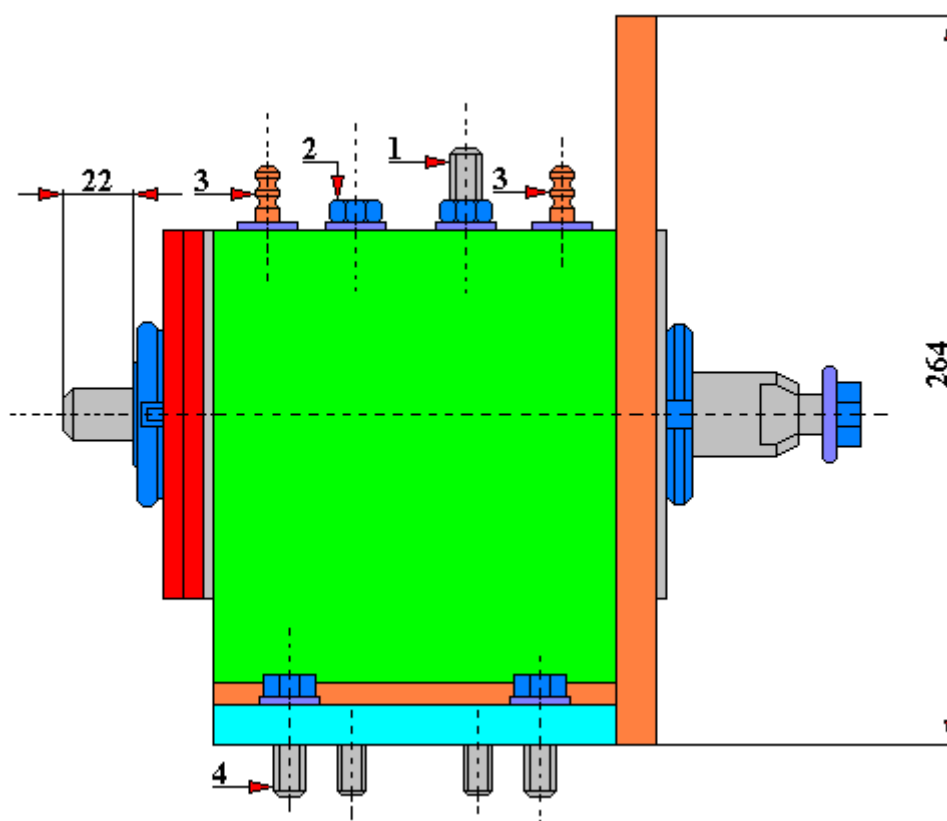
General view (side) of the headstock of the lower sample of the CML-2 (SMC-2) tribotester
